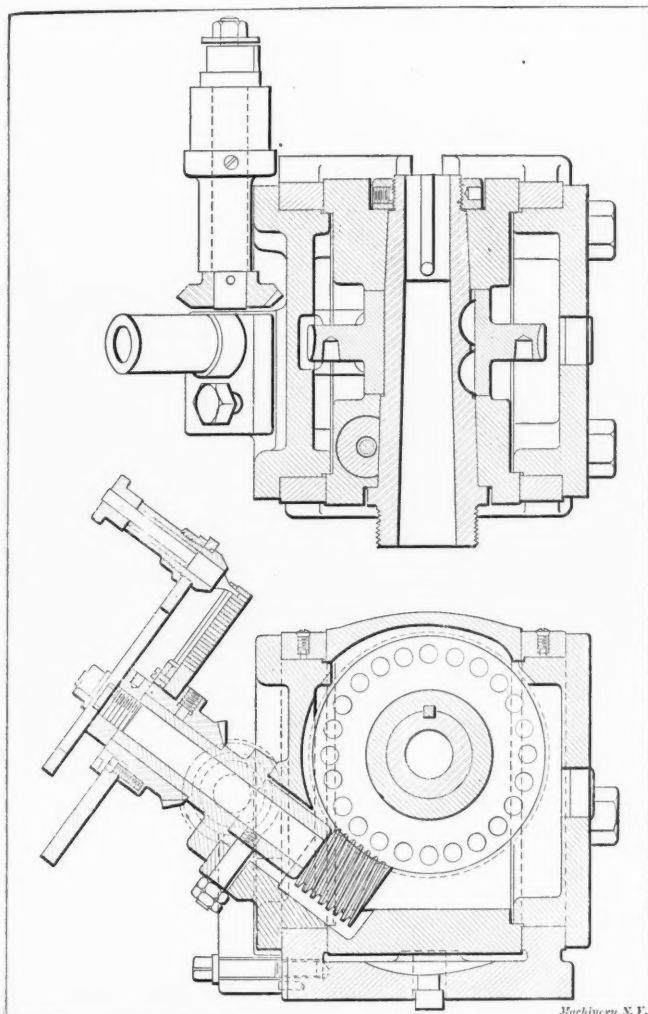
Horizontal and Vertical Sections of Dividing Head
